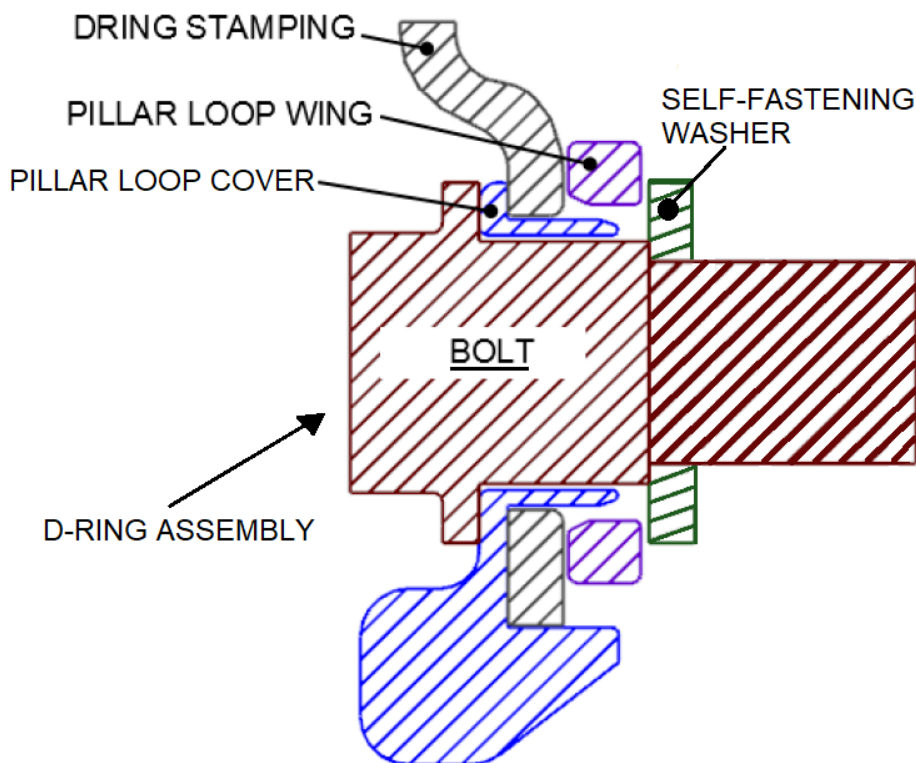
Cross-Sectional View of D-Ring Assembly having the Self-Fastening Washer of the Present Disclosure
